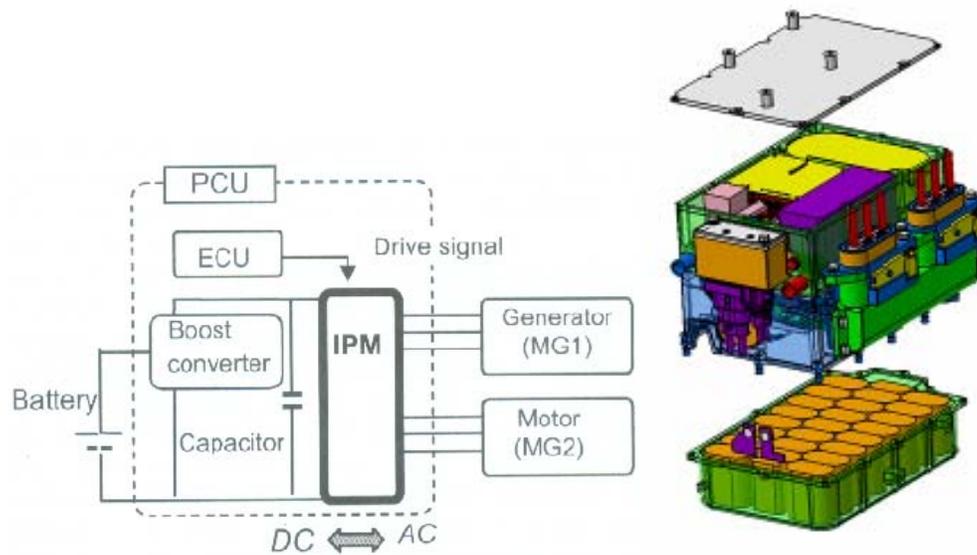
Camry HEV PCU Schematic and Exploded View.
